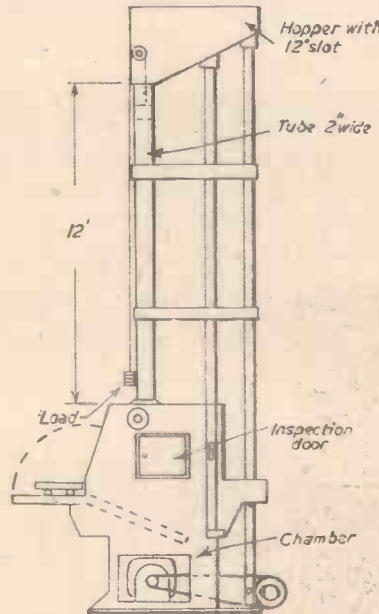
The Cloudburst testing machine shown diagrammatically.
